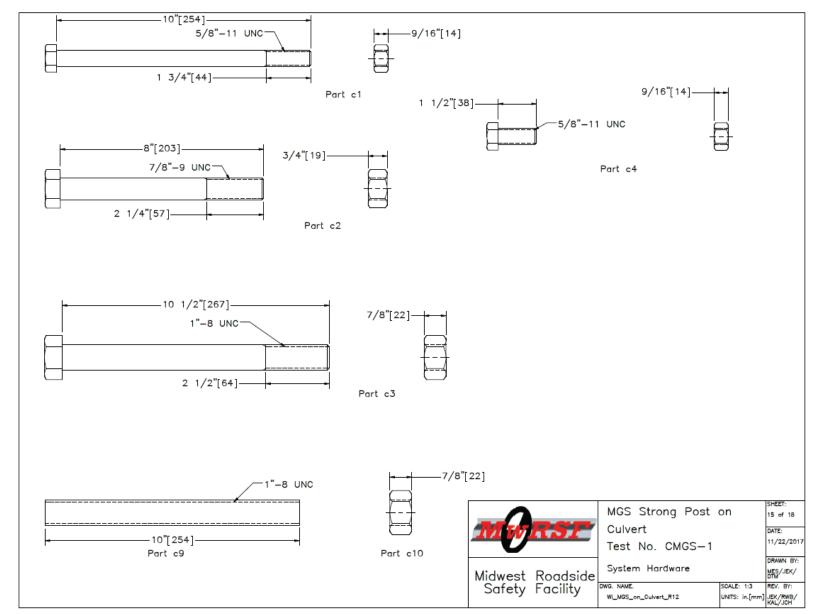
System Hardware Details, Test Nos. CMGS-1 and CMGS-2
